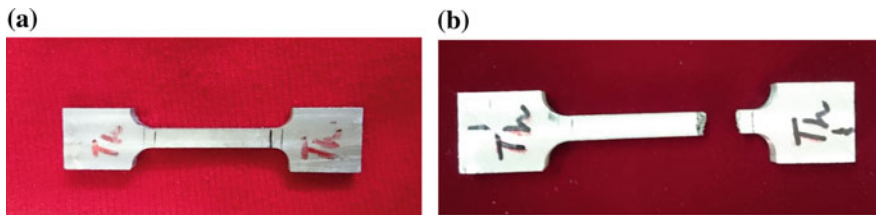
a Tensile specimen before testing. b Tensile specimen after testing
